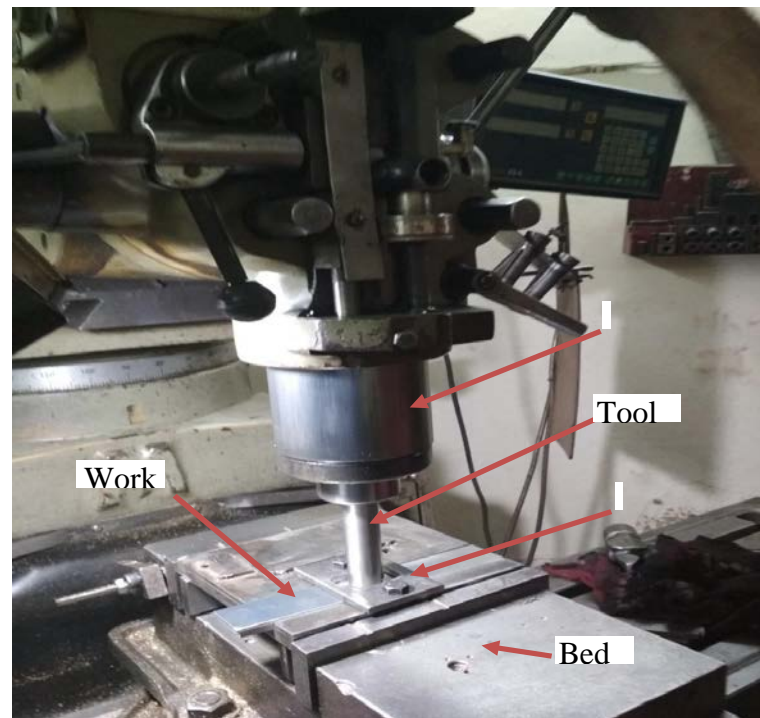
Flat Friction Stir Spot Welding Setup
